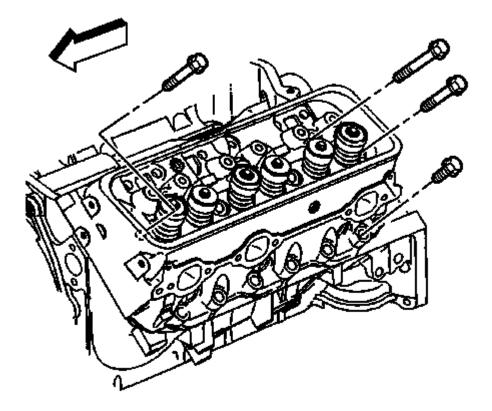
Locating Cylinder Head Bolts (Left) Courtesy of GENERAL MOTORS CORP.
